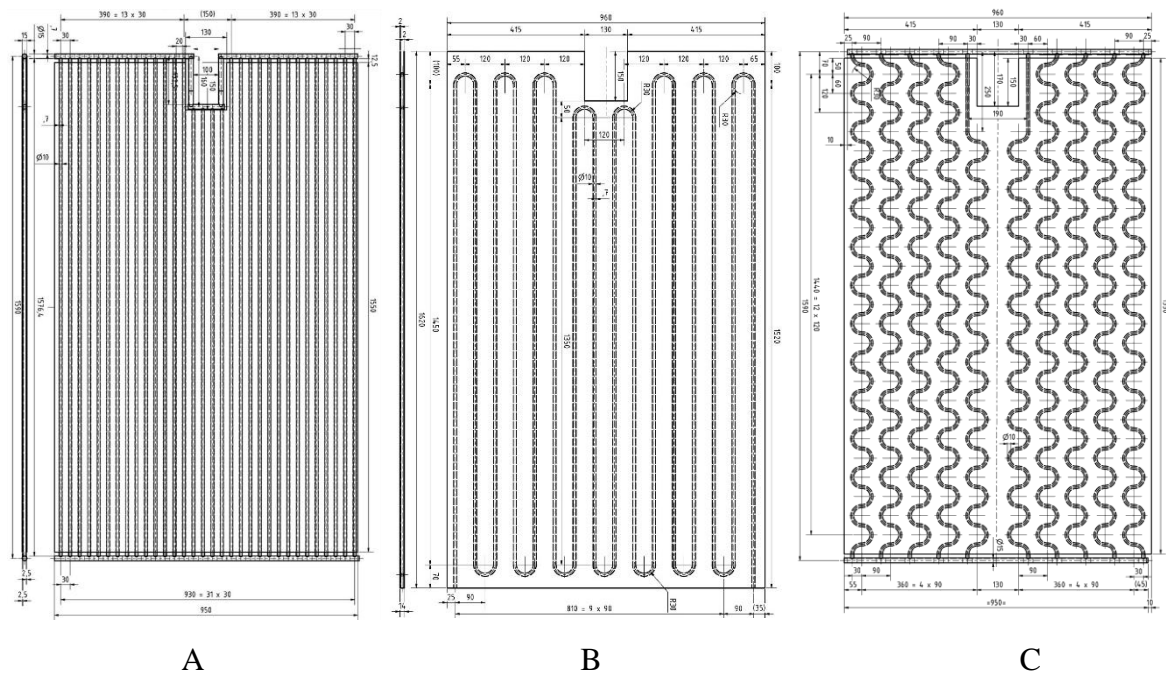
Constructive details of the cooling system configurations: A – Register-type configuration, B – Single-serpentine configuration, C – Multi-serpentine configuration
